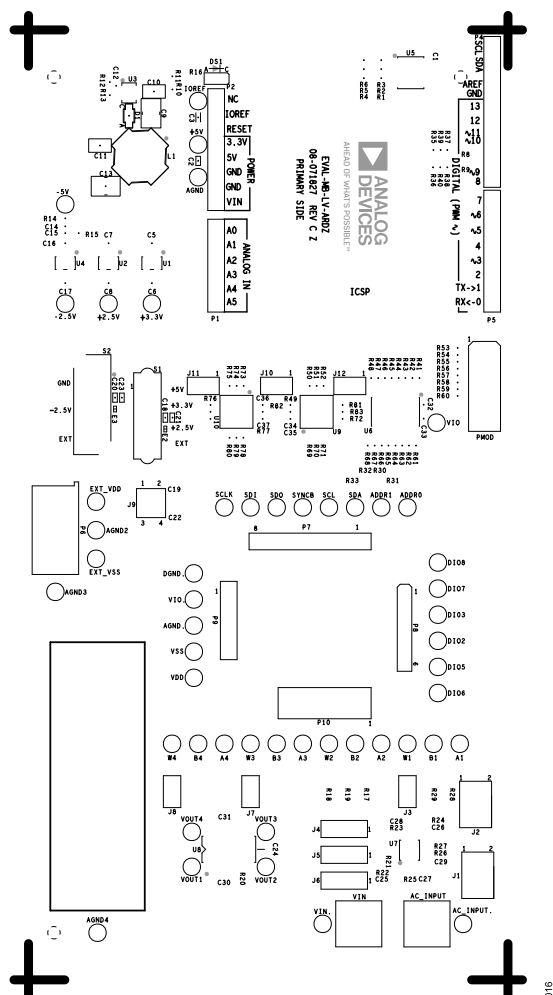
EVAL-MB-LV-ARDZ Board Layout Solder Mask Primary
